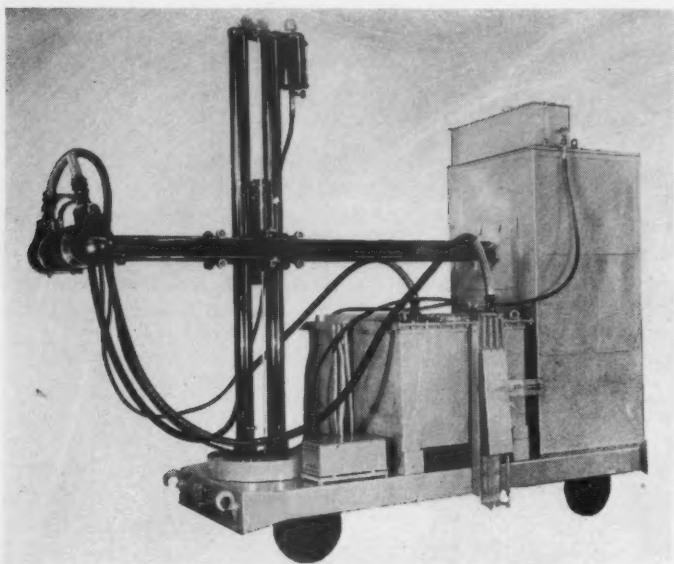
PORTABLE X-RAY MACHINE WITH SHIELDED, SHOCKPROOF, ADJUSTABLE HEAD; OIL IMMERSSED TRANSFORMER AND RECTIFYING UNIT, AND CONTROL CABINET.
